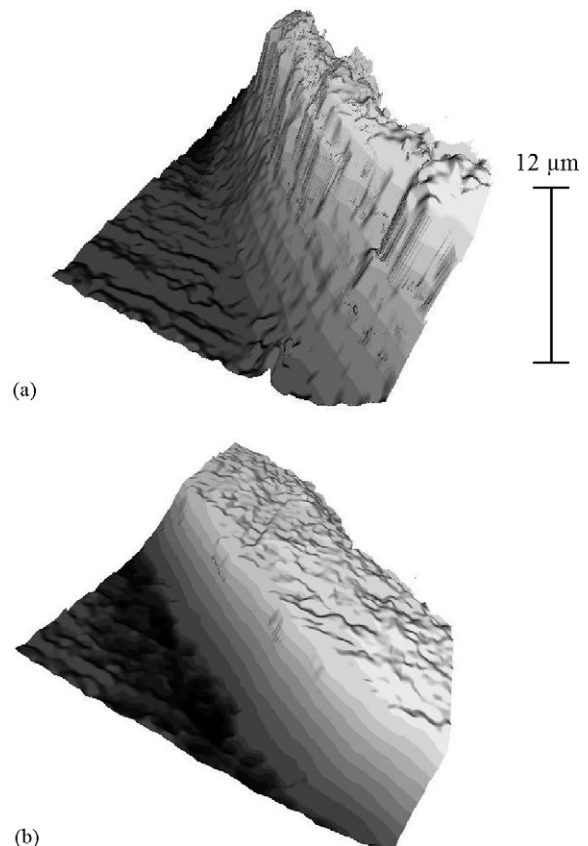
Burr crushing: (a) blanking burr after one strike and (b) blanking burr in a progressive tool.
